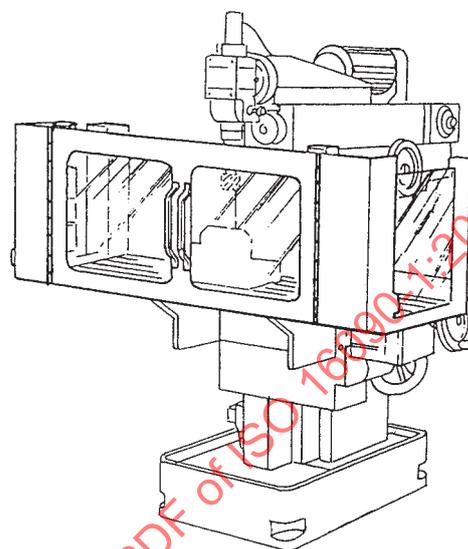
Examples of adjustable guards for manually controlled milling machines
